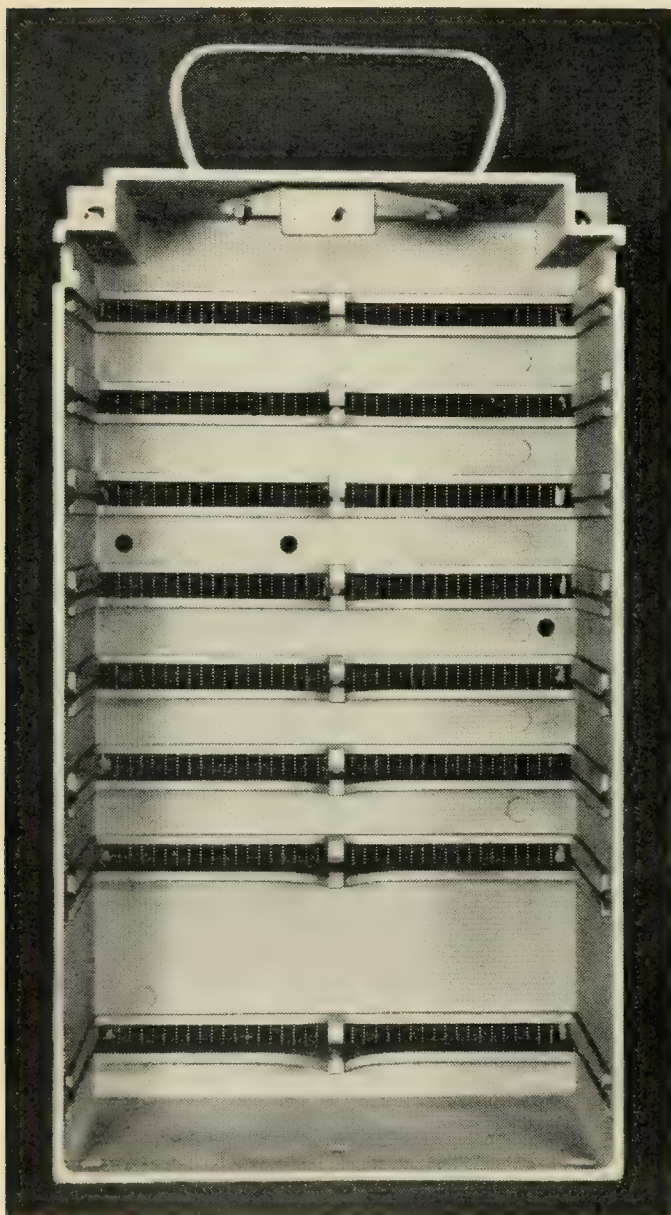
Prototype model of connector box unequipped showing grid wires.
